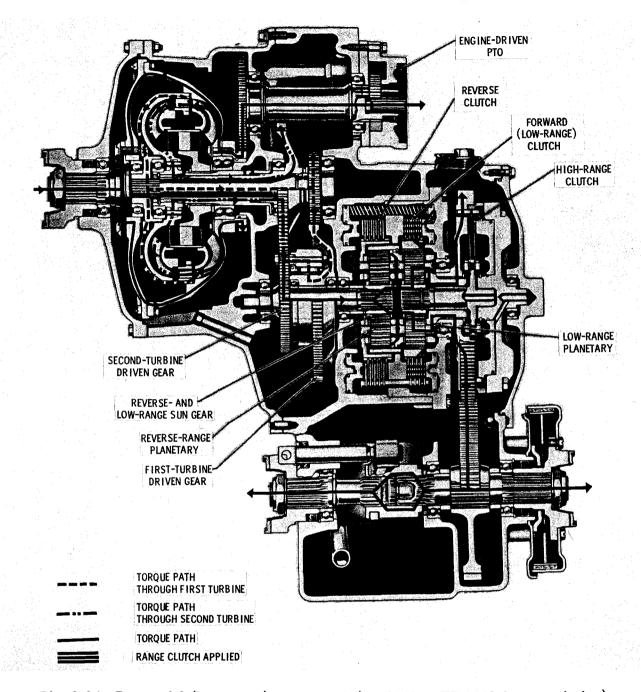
Forward-1 (low-range) torque path (TT 2221-1, TT 2421-1 transmission)
